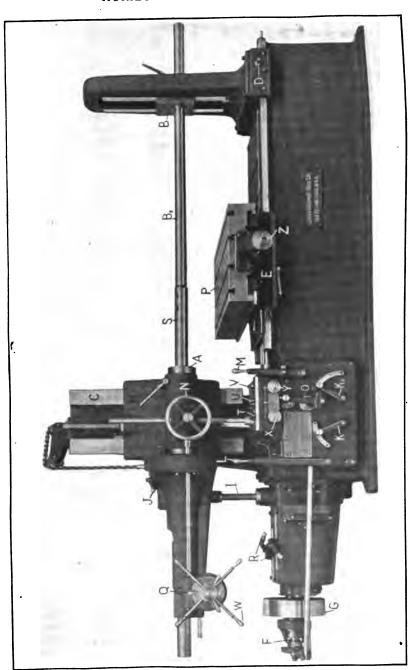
Lucas Horizontal Boring, Drilling and Milling Machine'
